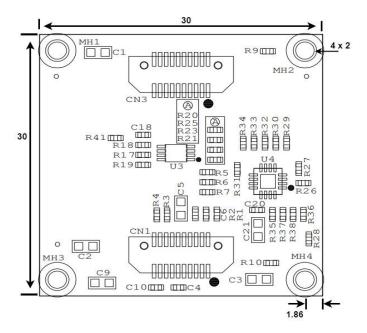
Front Portion of e-CAM22_CUNX Adaptor Board Mechanical Dimensions
